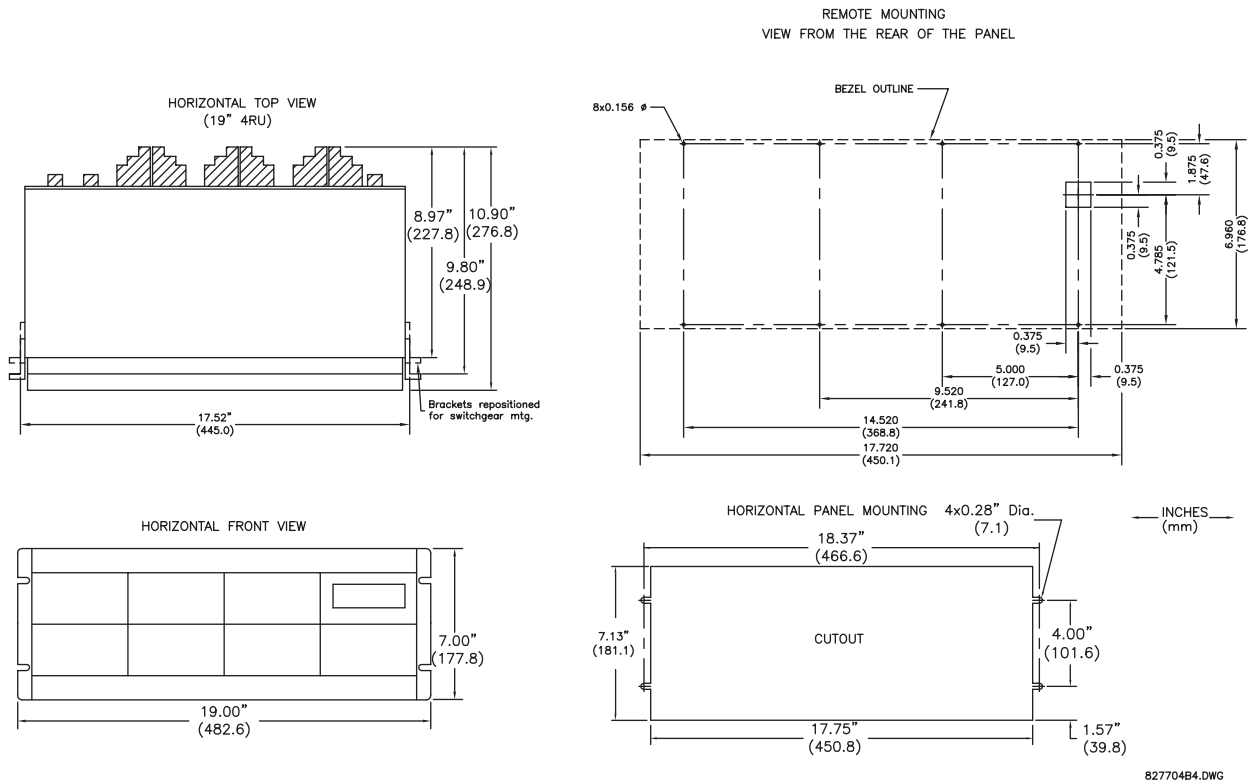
L90 HORIZONTAL MOUNTING AND DIMENSIONS
